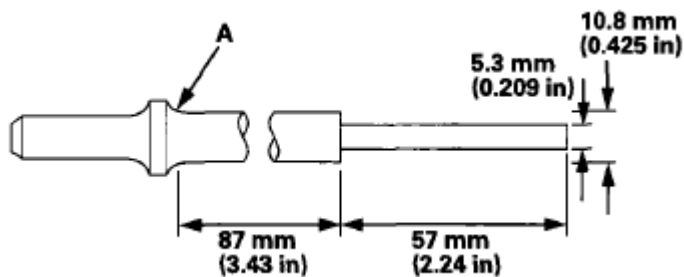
Identifying Commercially Available Air-Impact Valve Guide Driver
